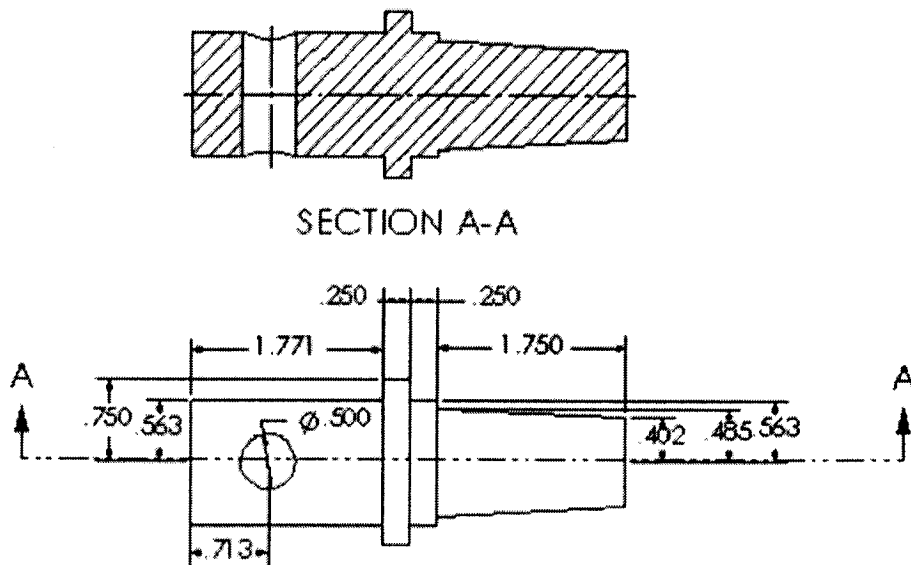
Tapered mounting end fitting used for tensile testing braided tubes (25.4 mm ID tube shown, dimensions in inches).
